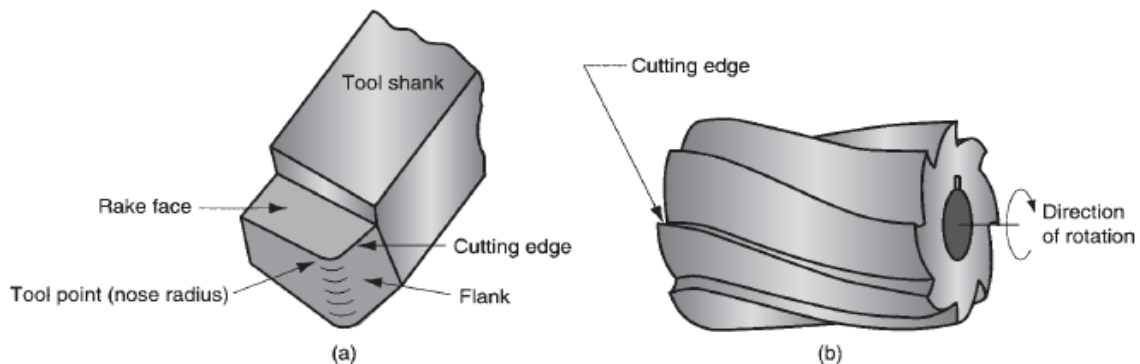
(a) A single-point tool showing rake face, flank, and tool point; and (b) a helical milling cutter, representative of tools with multiple cutting edges.
